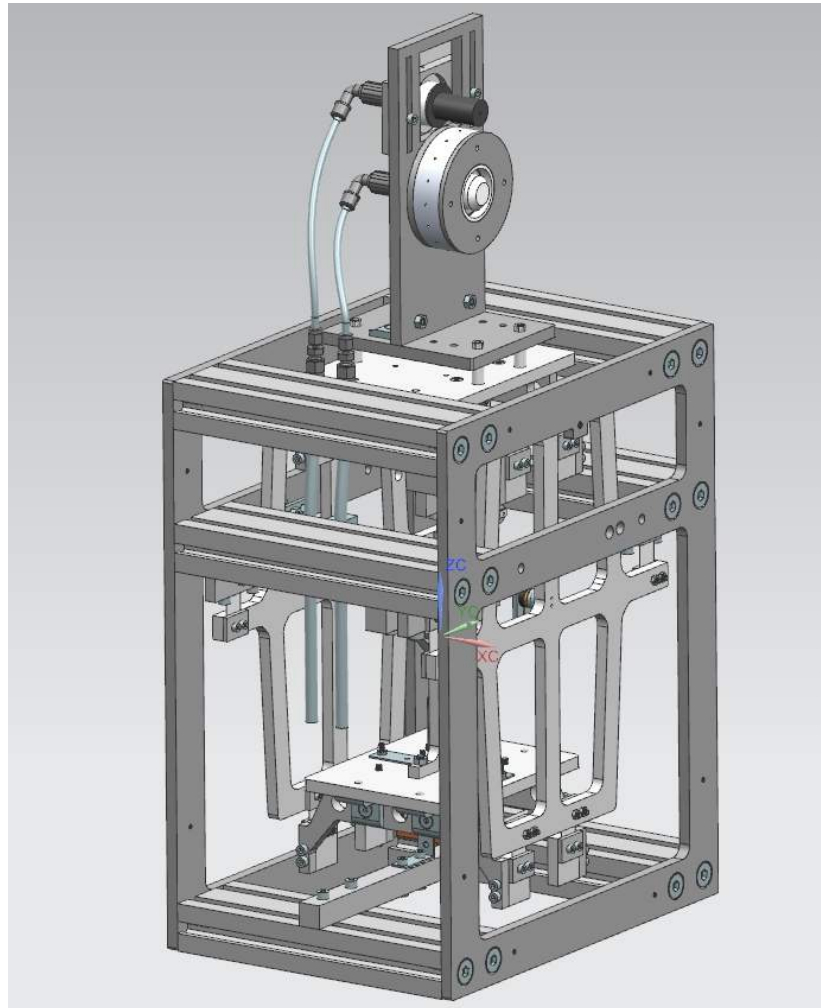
3D drawing of Thrust Stand with HK40 Hall Thruster
